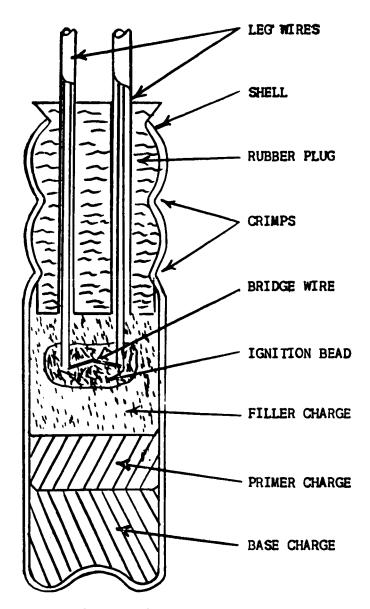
Cross-Section Drawing of Blasting Cap.
